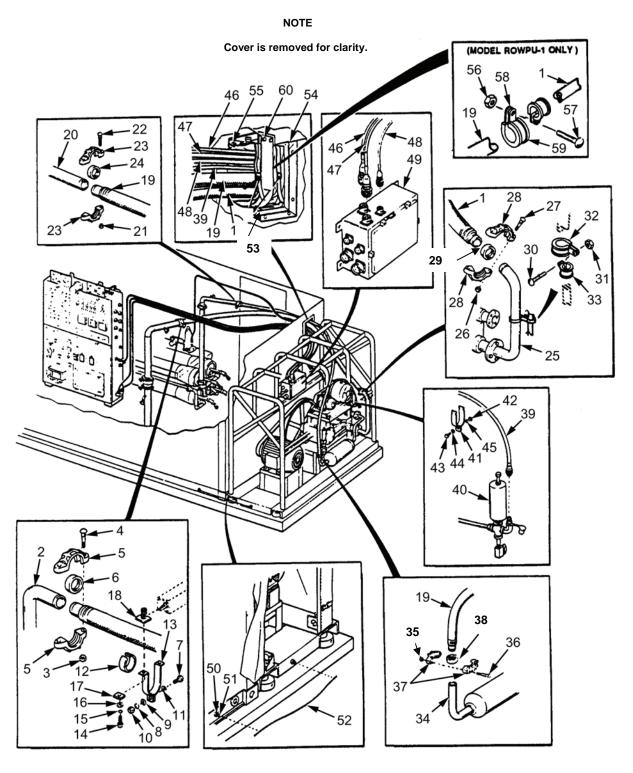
High Pressure Pump Assembly (Sheet 1 of 2).
